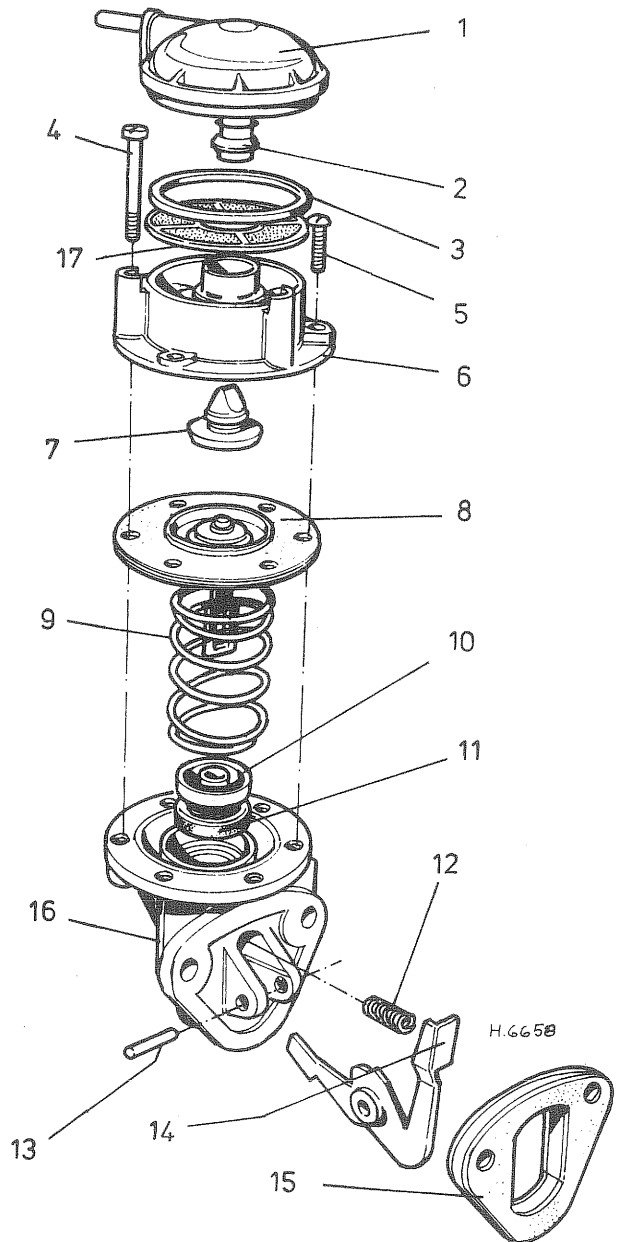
Exploded view of the AUF 700 mechanical fuel pump (Sec 10)
